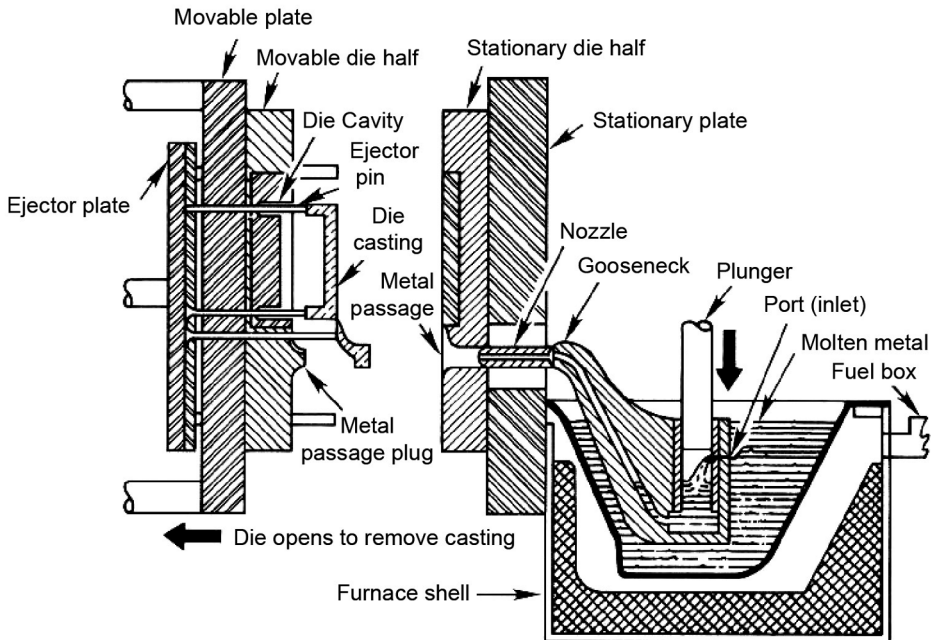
Hot chamber die casting machine showing a casting being ejected [Bra89].
